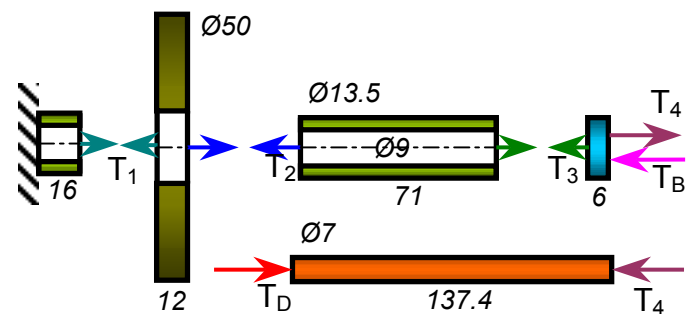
Mechanical model and dimensions of the rheometer parts in mm
